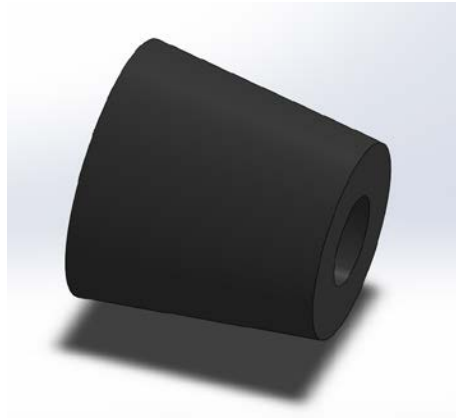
CAD for Rubber Bung to Provide Friction Between Threaded Rod and PVC of Conveyor Drive Roller
